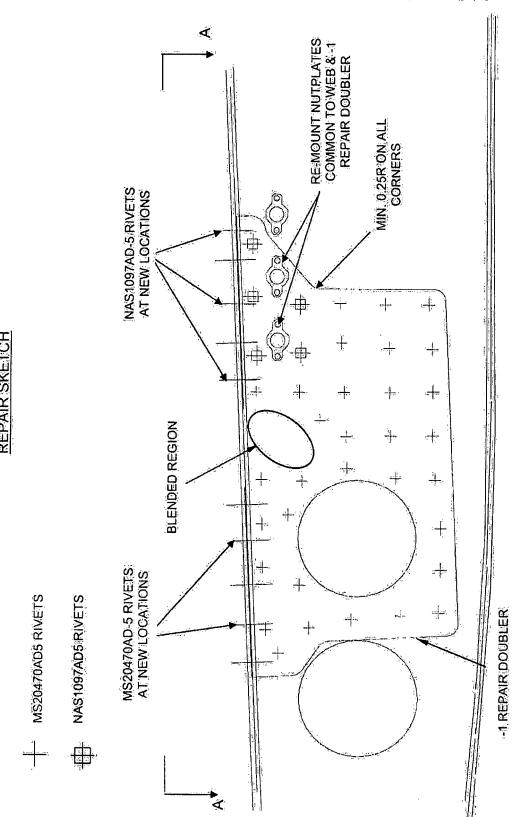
REPAIR DETAIL - LH ENGINE BEAM BLEND
